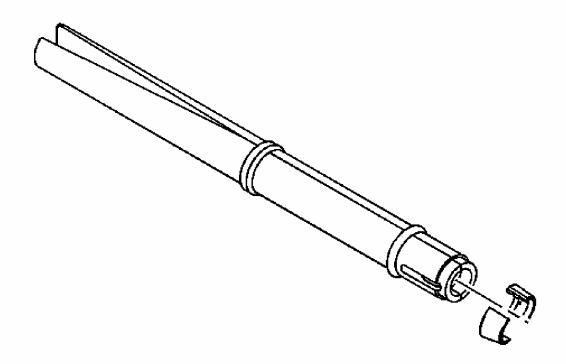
Installing Valve Keepers With EN 46117 Courtesy of GENERAL MOTORS CORP.
